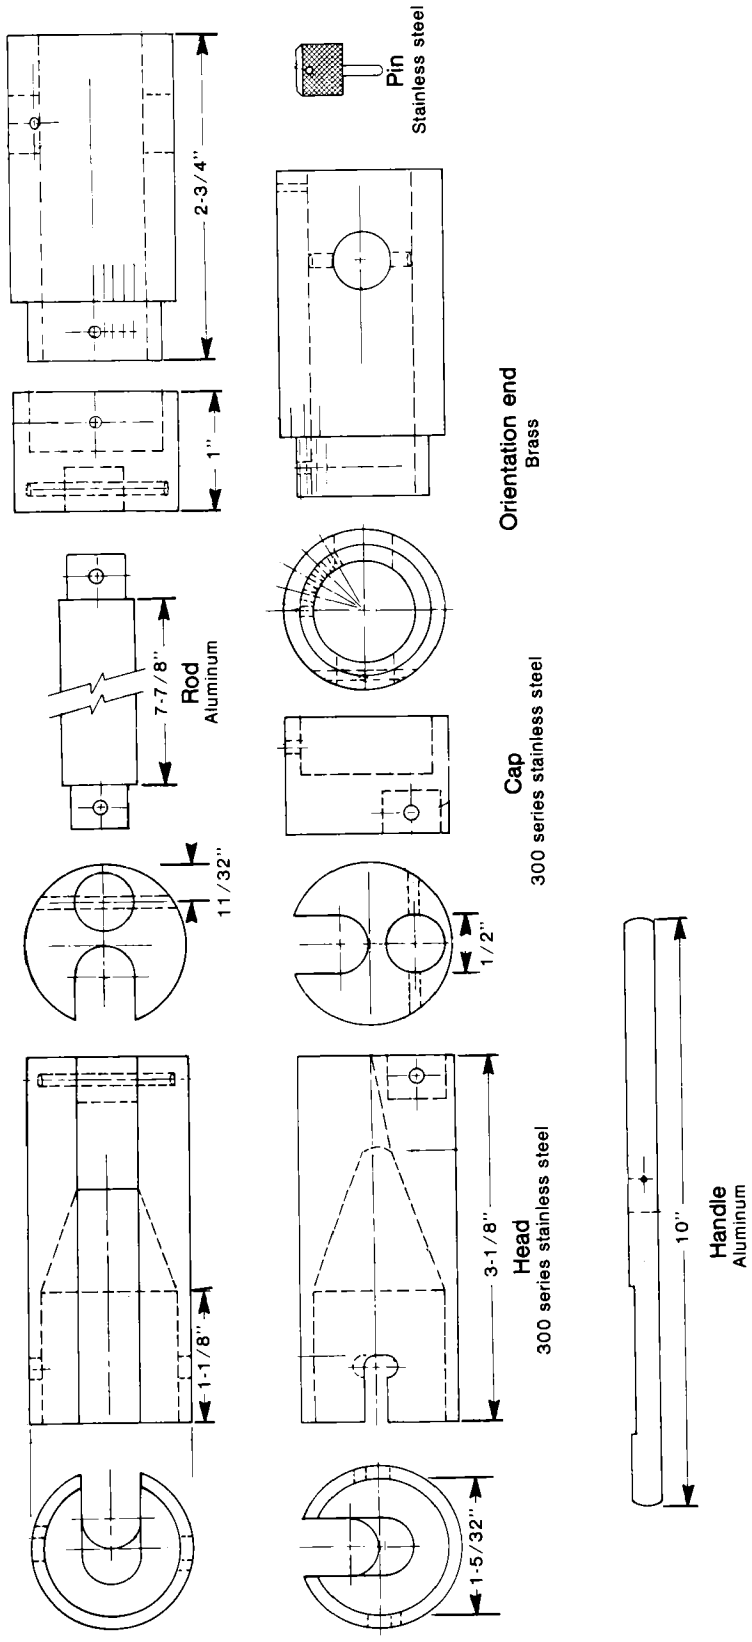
Borehole gauge placement tool for biaxial chamber.
